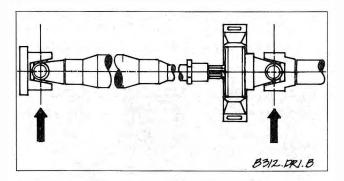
If driveshaft sections are separated, make sure U-joints are on same plane as shown when driveshaft is reassembled.
